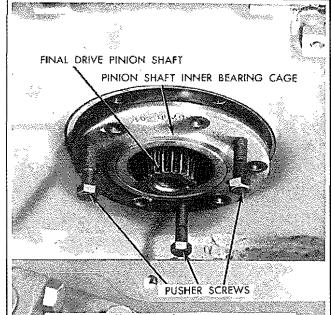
Pulling Final Drive Pinion Shaft – Inner Bearing Cage
